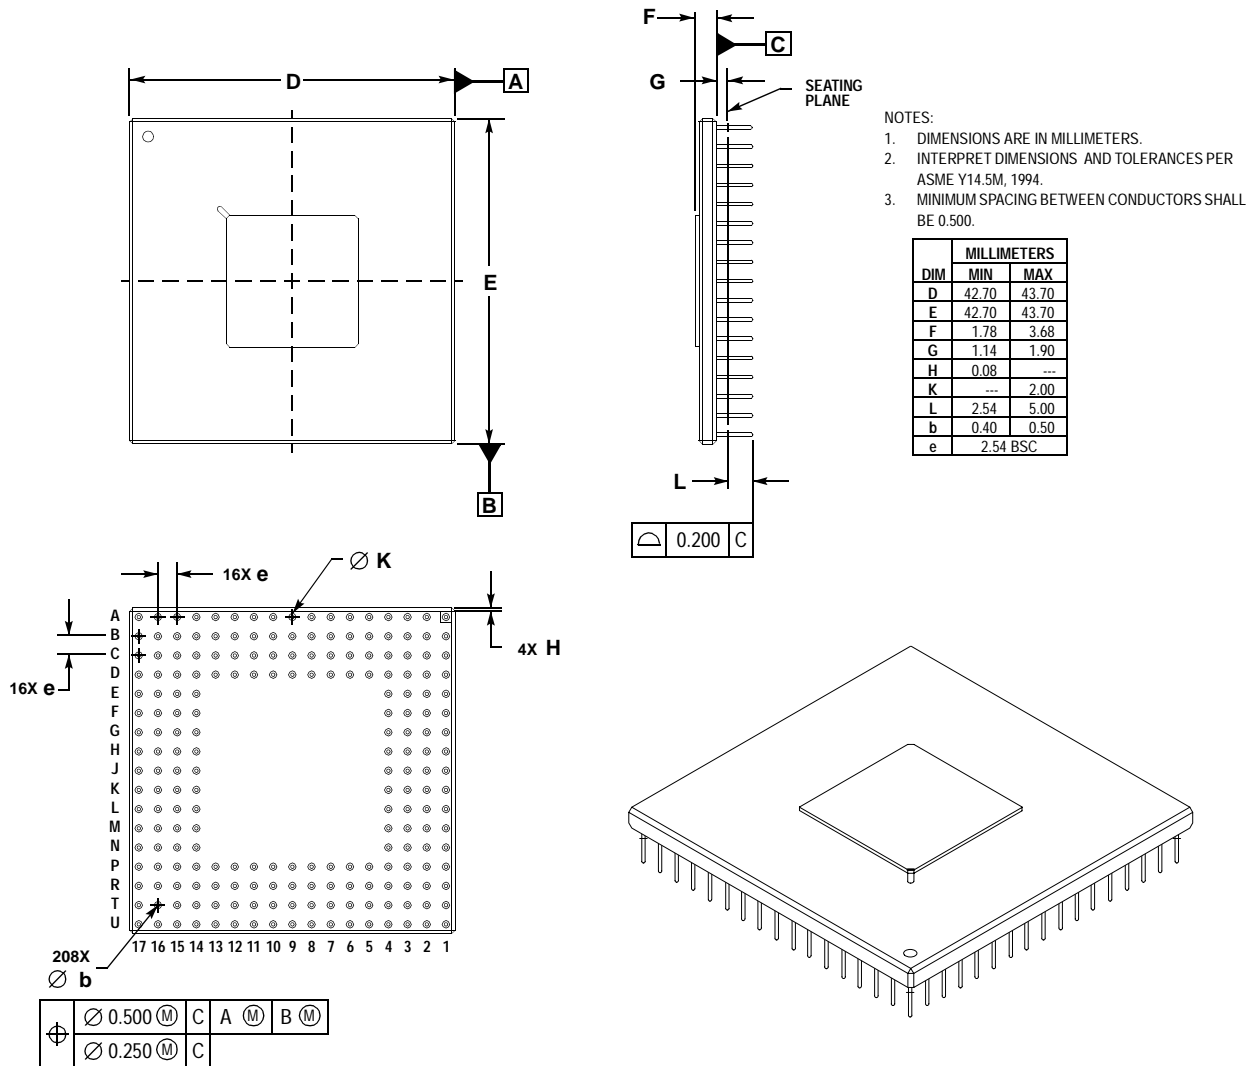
MMC2080/2075 PGA Mechanical Drawings
